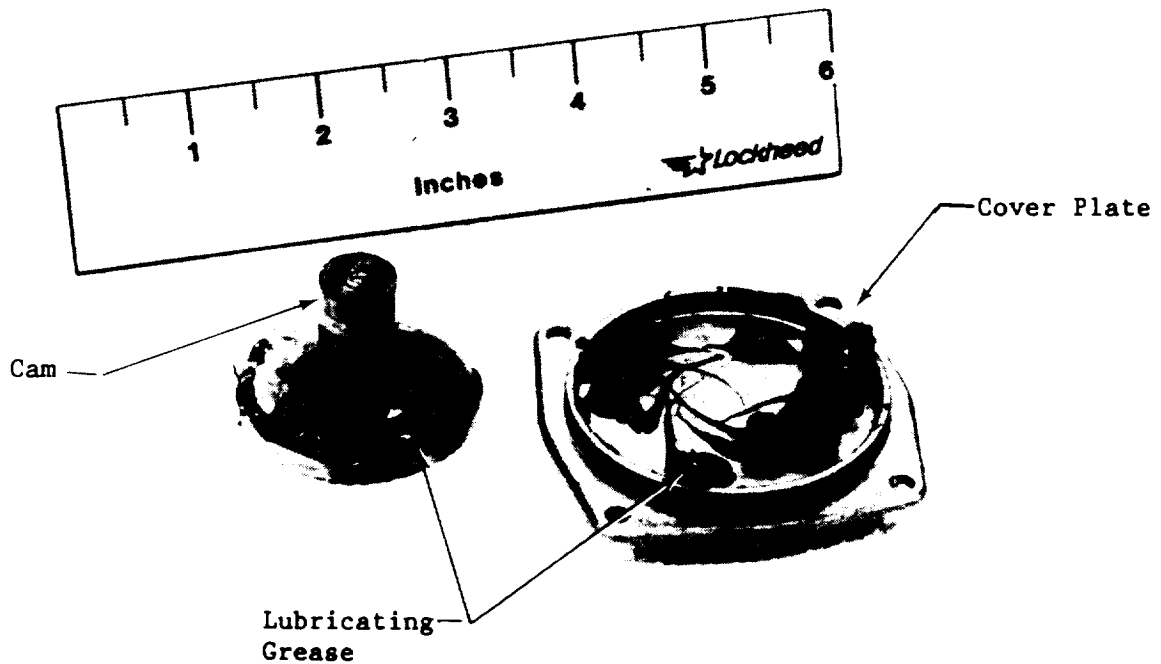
Cam Bearing from Vapor Compression Unit (Diaphragm Compressor)
